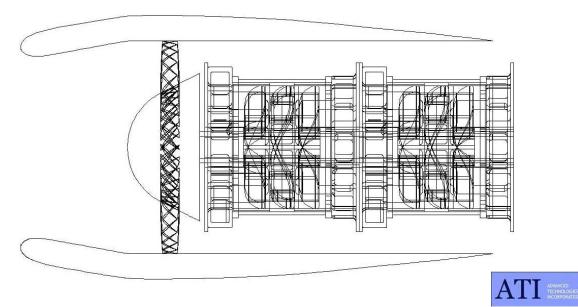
Cross-section PAX 150 diesel core engine with radial porting.
